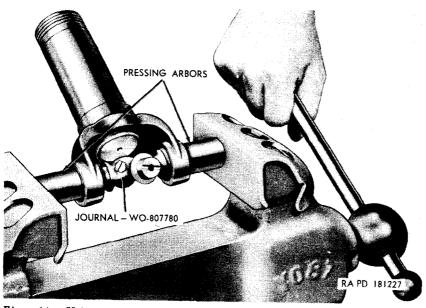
Using vise to press universal joint bearing assemblies into proper position.
